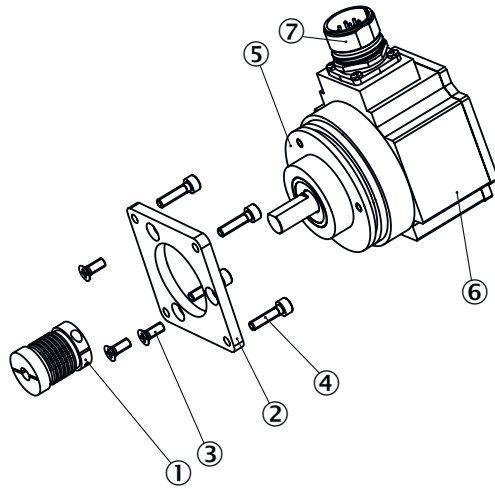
Motor feedback system with Face mount Flange (Standalone)
